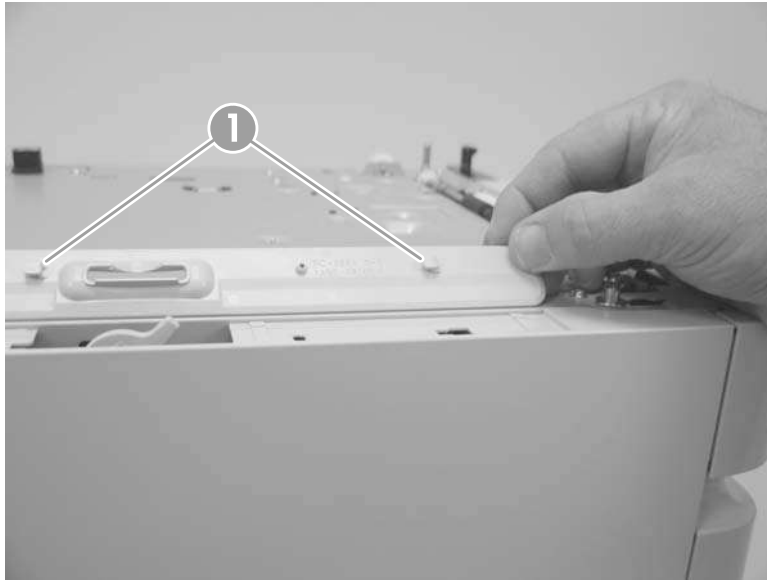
Remove the 1,500-sheet feeder right-side cover (2 of 2)
